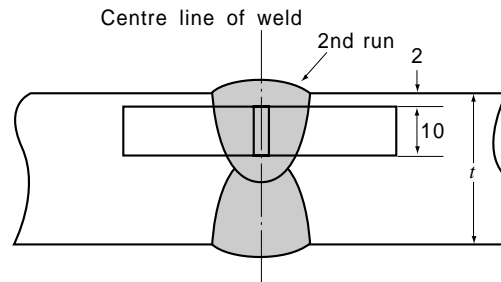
Position of impact Test Specimen for Butt Weld Test Assembly with Two-Run Technique (Unit: mm, t : plate thickness)
